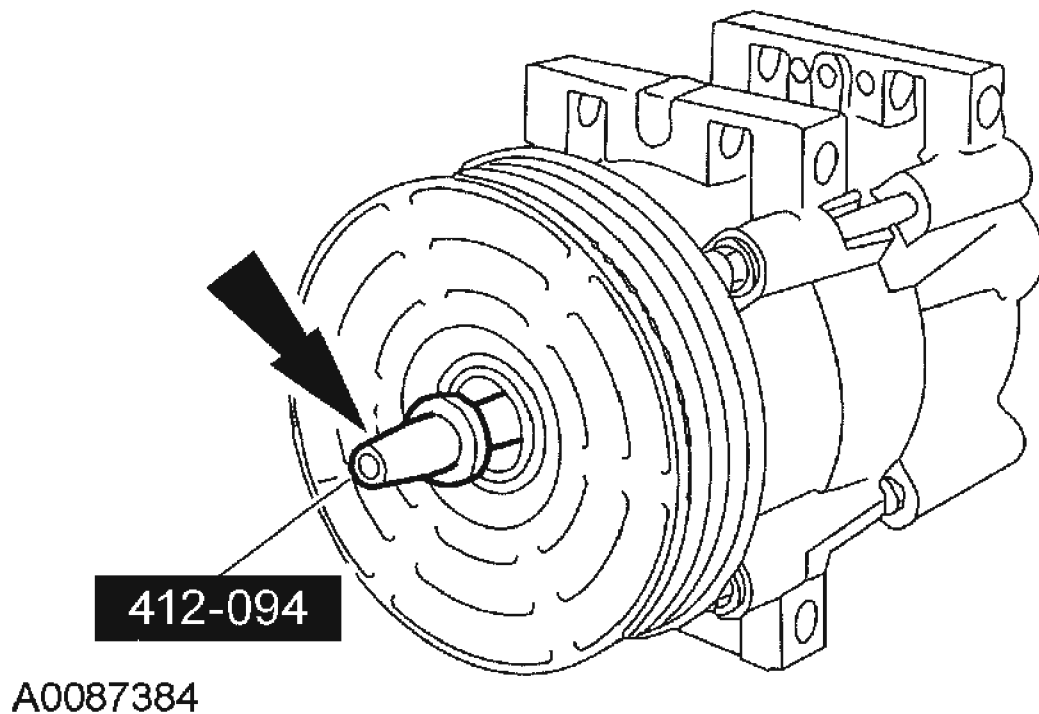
Positioning Shaft Seal And Special Tool Over A/C Compressor Shaft
